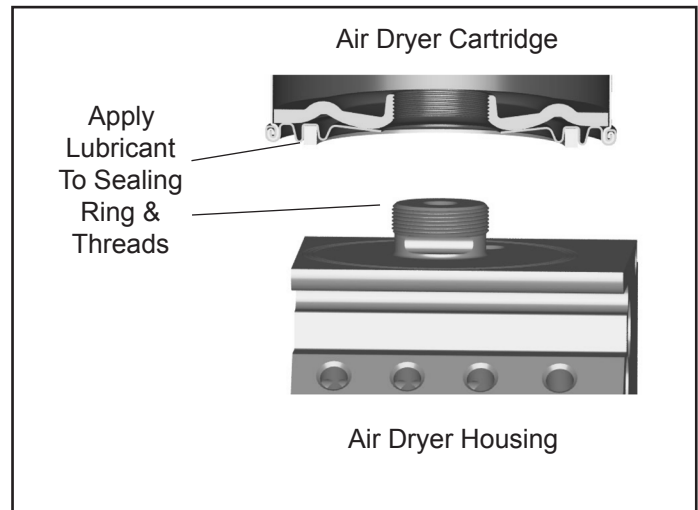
Lubricating the Cartridge Sealing Ring & Housing Threads
